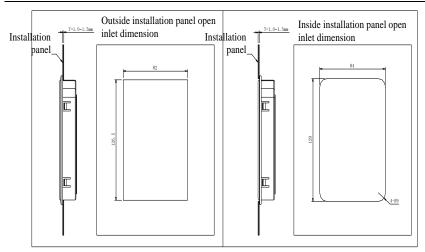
ST500 keyboard installation open inlet dimension(mm)
